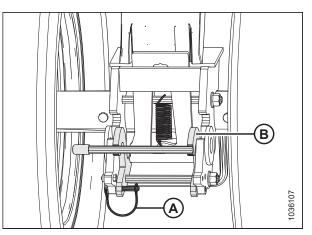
Left Transport Wheels – Rotation Lock Latch Engaged
